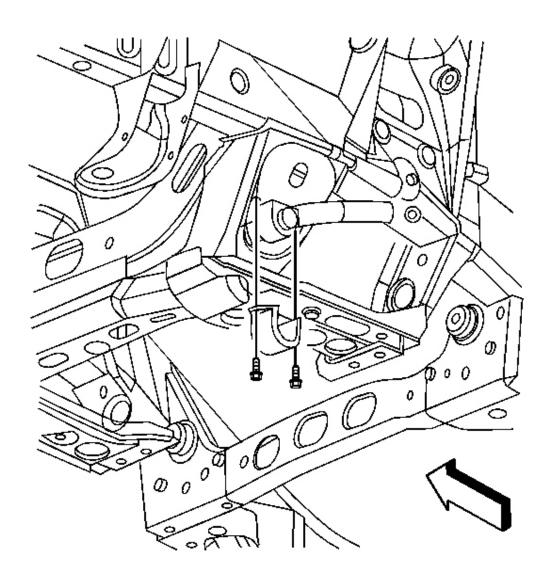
View Of Stabilizer Shaft, Insulator, Insulator Clamp & Mounting Bolts Courtesy of GENERAL MOTORS CORP.
